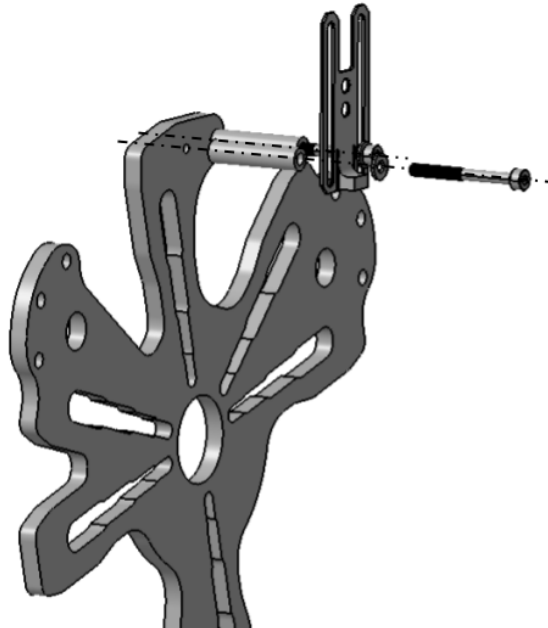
Connection of the screw, washer, spacers, and optical probe to the motor mount
